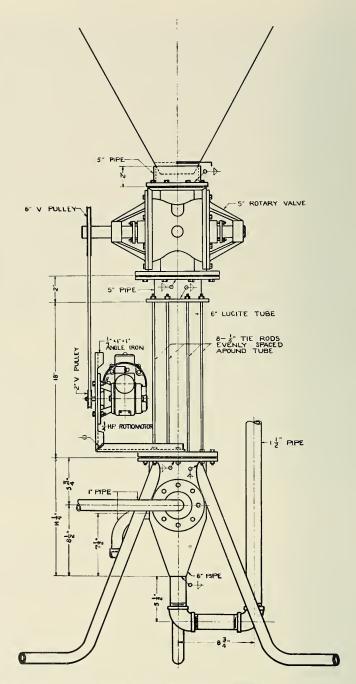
ROTARY VALVE above fluidizing chamber.
